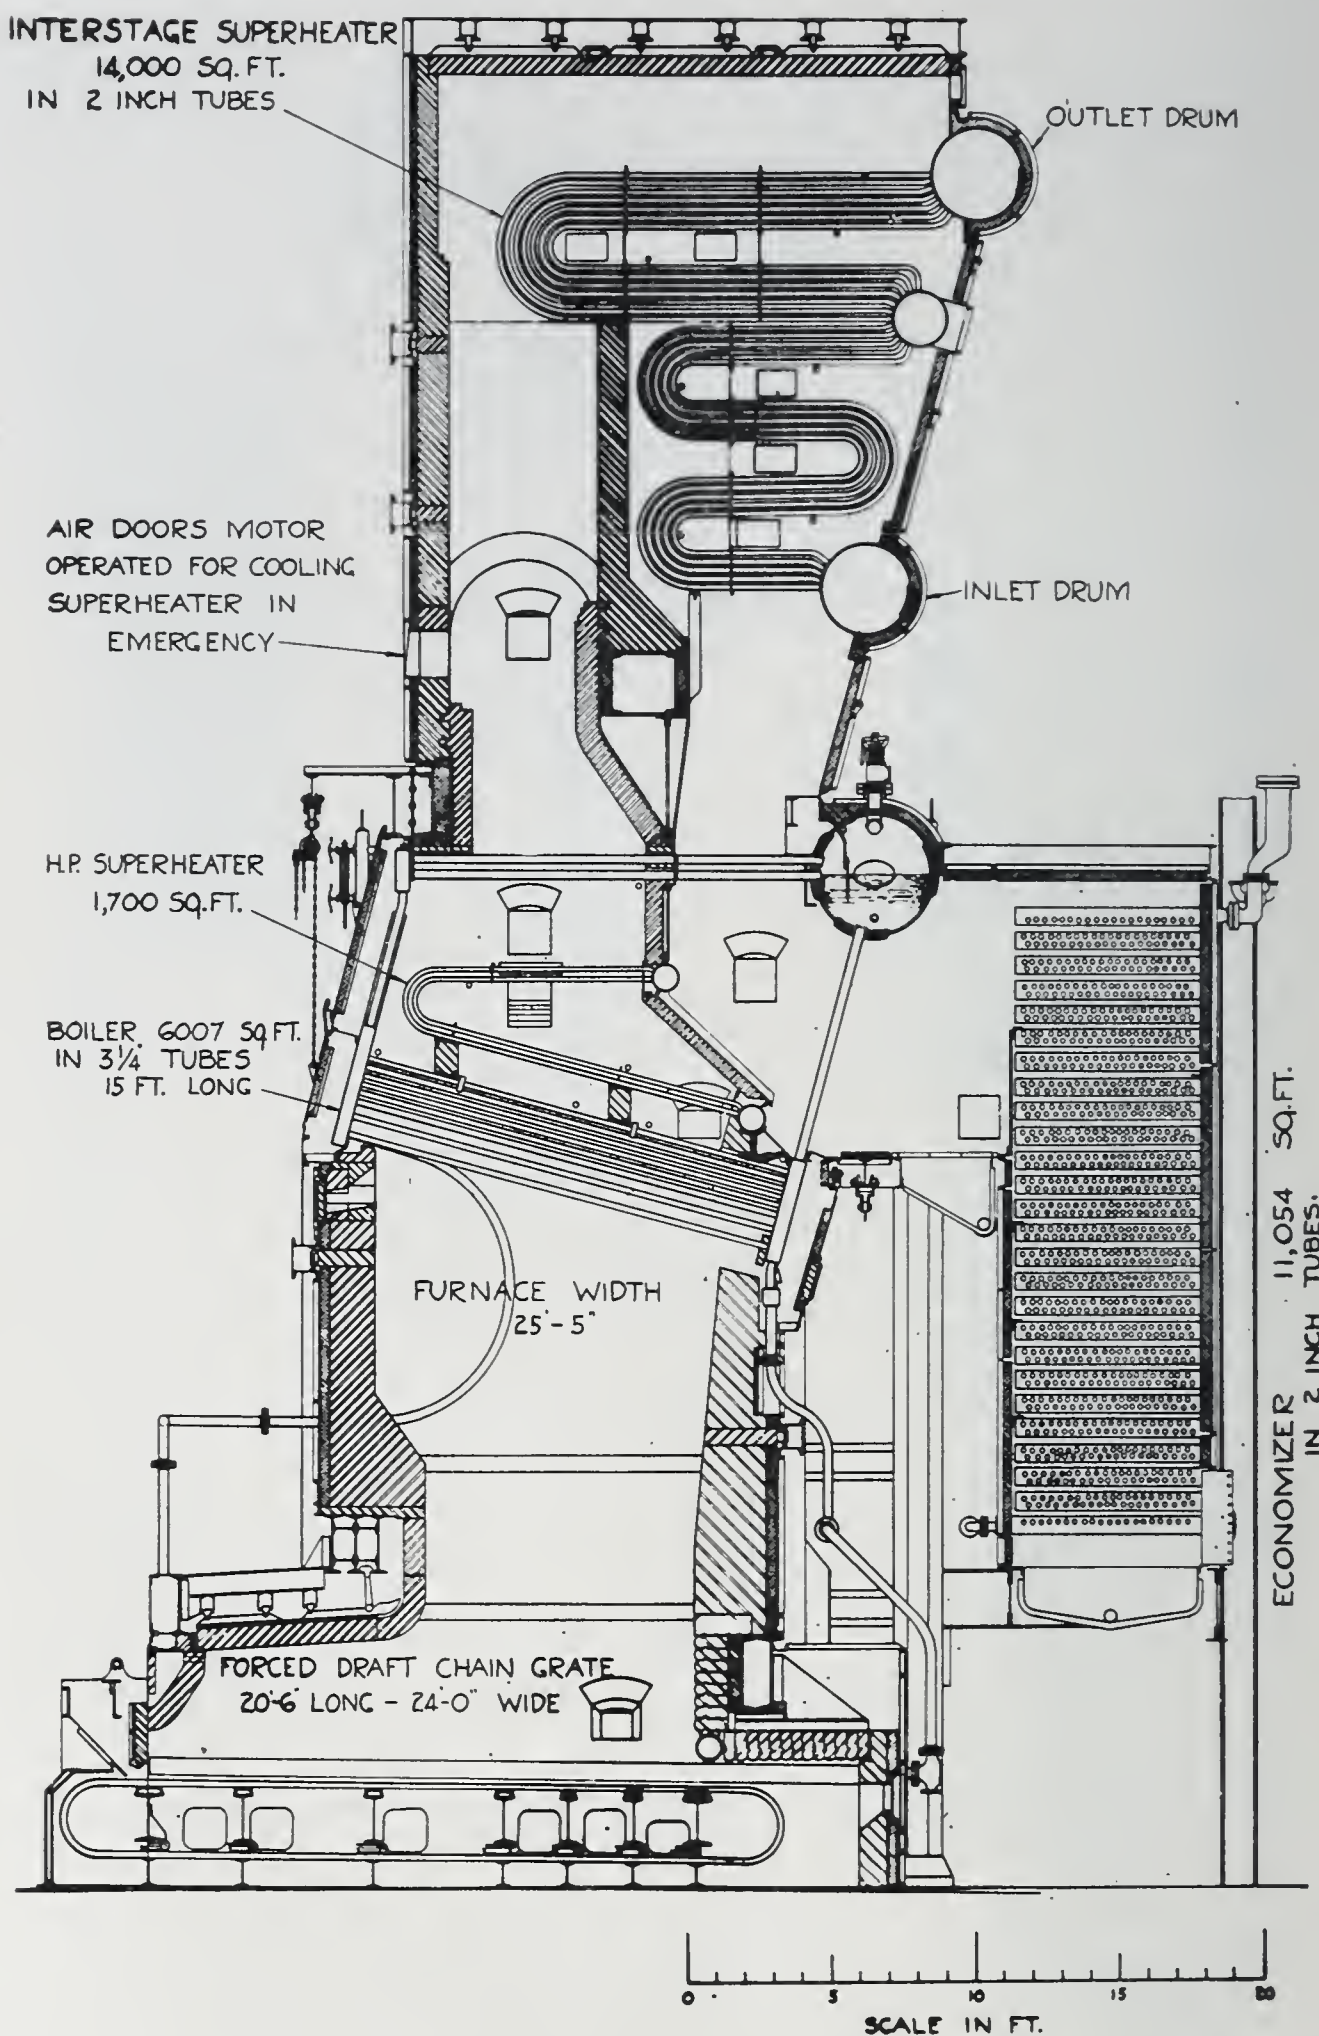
Babcock & Wilcox Reheater Superheater Boiler Fired with Babcock & Wilcox Forced-Draft Chain-Grate Stoker, with Interdeck Primary Superheater and Economizer.
